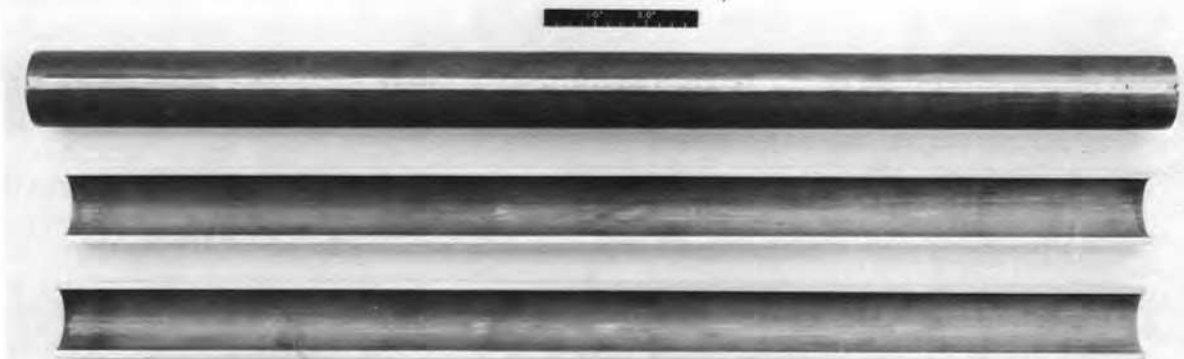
Typical electron-beam welded tube hollow fabricated from semiproduction heats of 2% Ti-modified Hastelloy N alloys.
